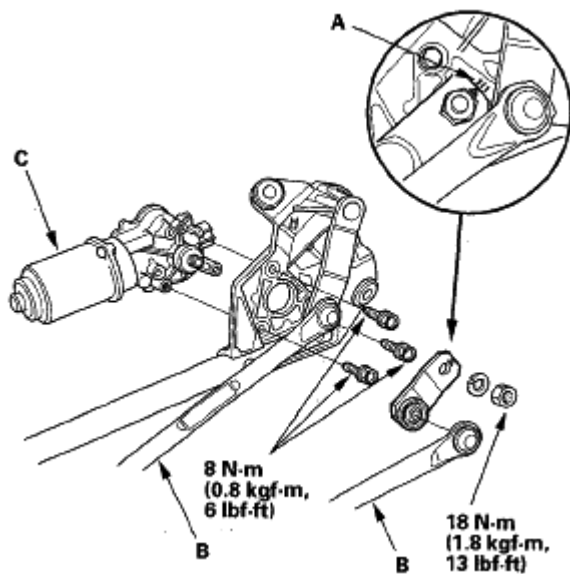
Identifying Wiper Motor And Windshield Wiper Linkage With Torque Specifications
